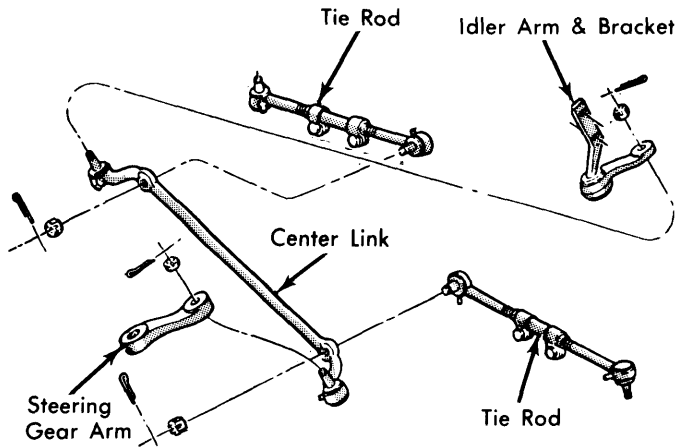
Disassembled View of Steering Linkage for "D", "AD", and "PD" Models
